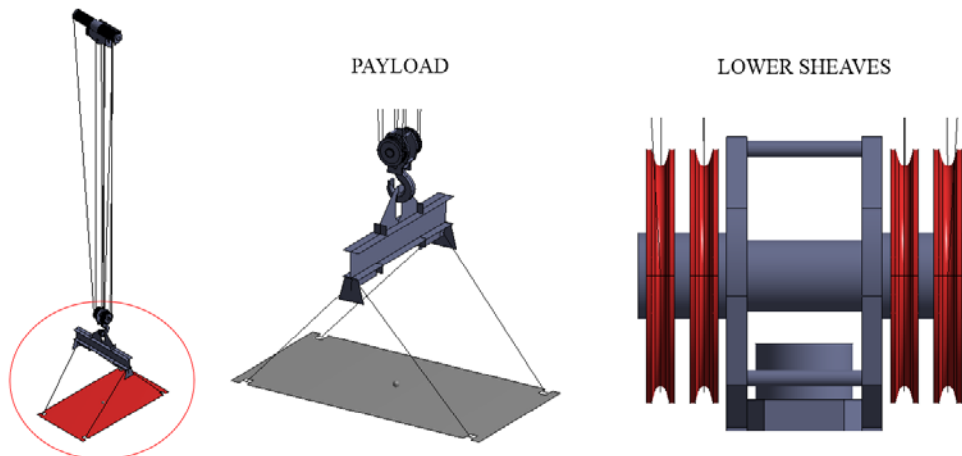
Overhead crane geometric components - lower block, lower sheaves, and payload
